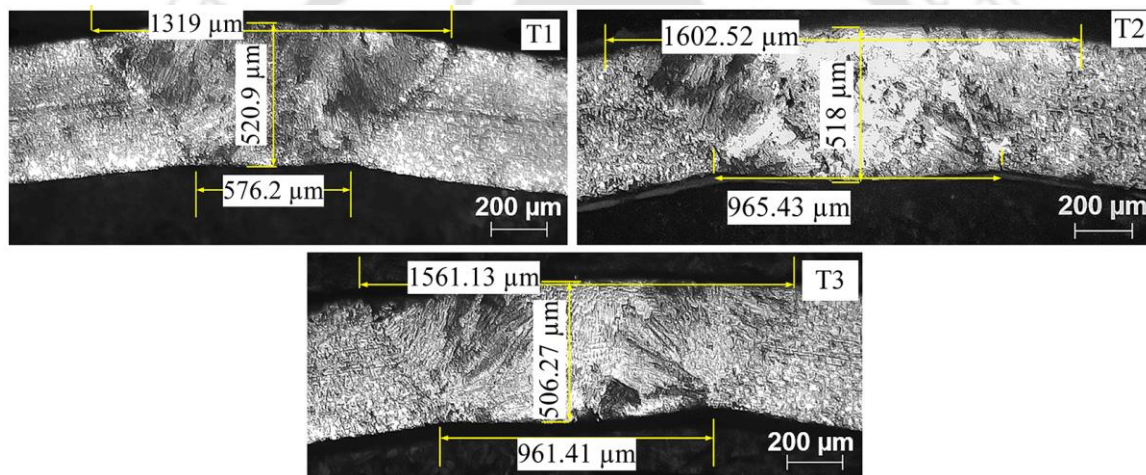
Top and bottom bead length and bead height of welded samples
